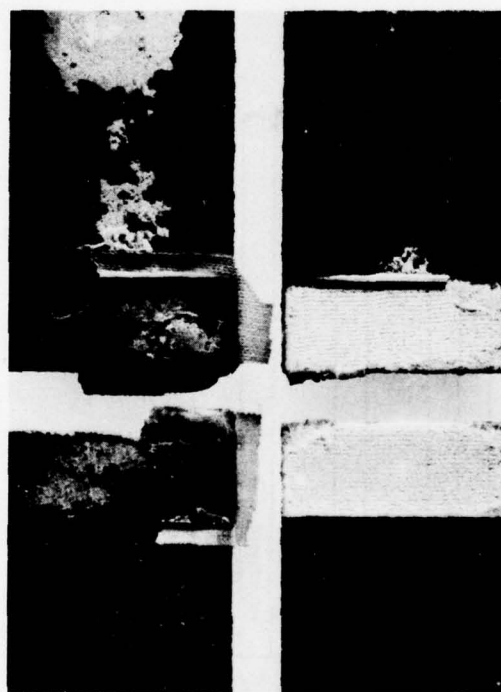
Fracture surfaces of mild-steel-bonds after aging in humid climate.
